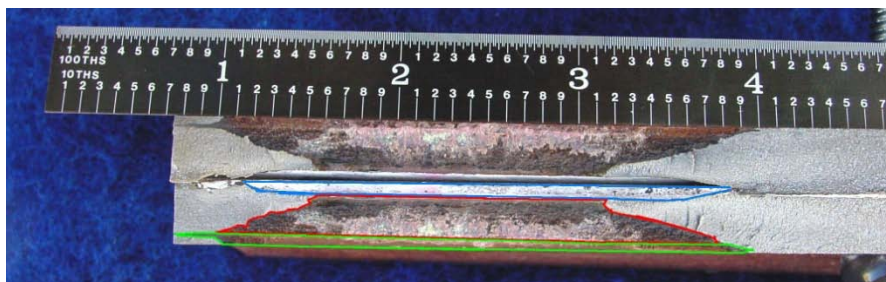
Fracture Surfaces of the Sulfide Stress Cracking that Took Place at an ID-Surface-Connected Hook Crack
